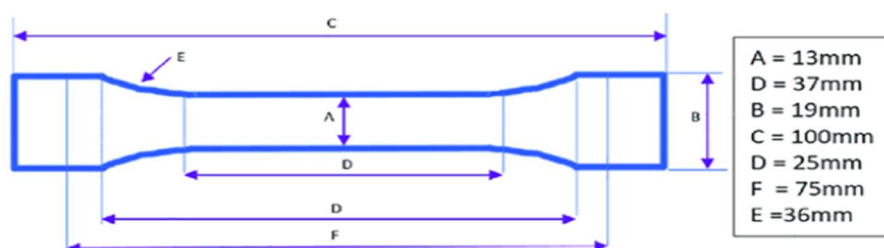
Standard Tensile Test Specimen (ASTM D638)
